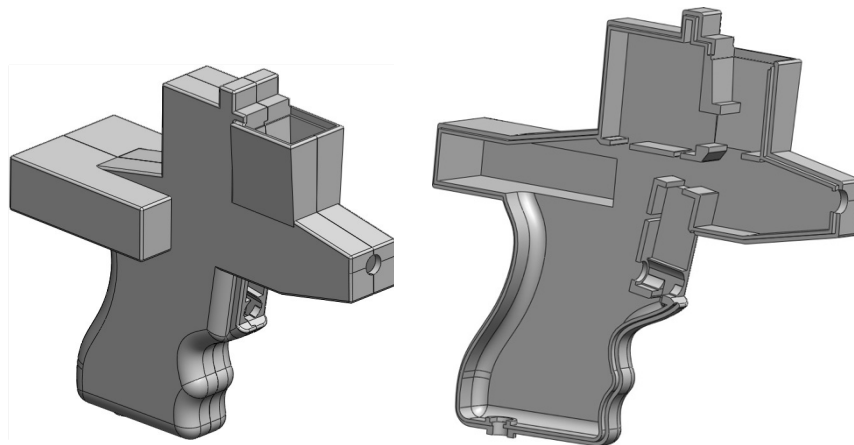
Complete powder spray device shell (Left). Half of device shell depicting internal section layout (Right)
